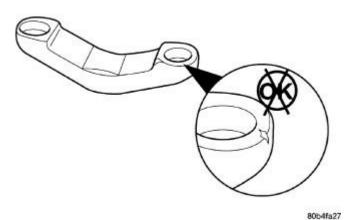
Inspecting Crosshead For Cracks Courtesy of CHRYSLER GROUP, LLC
